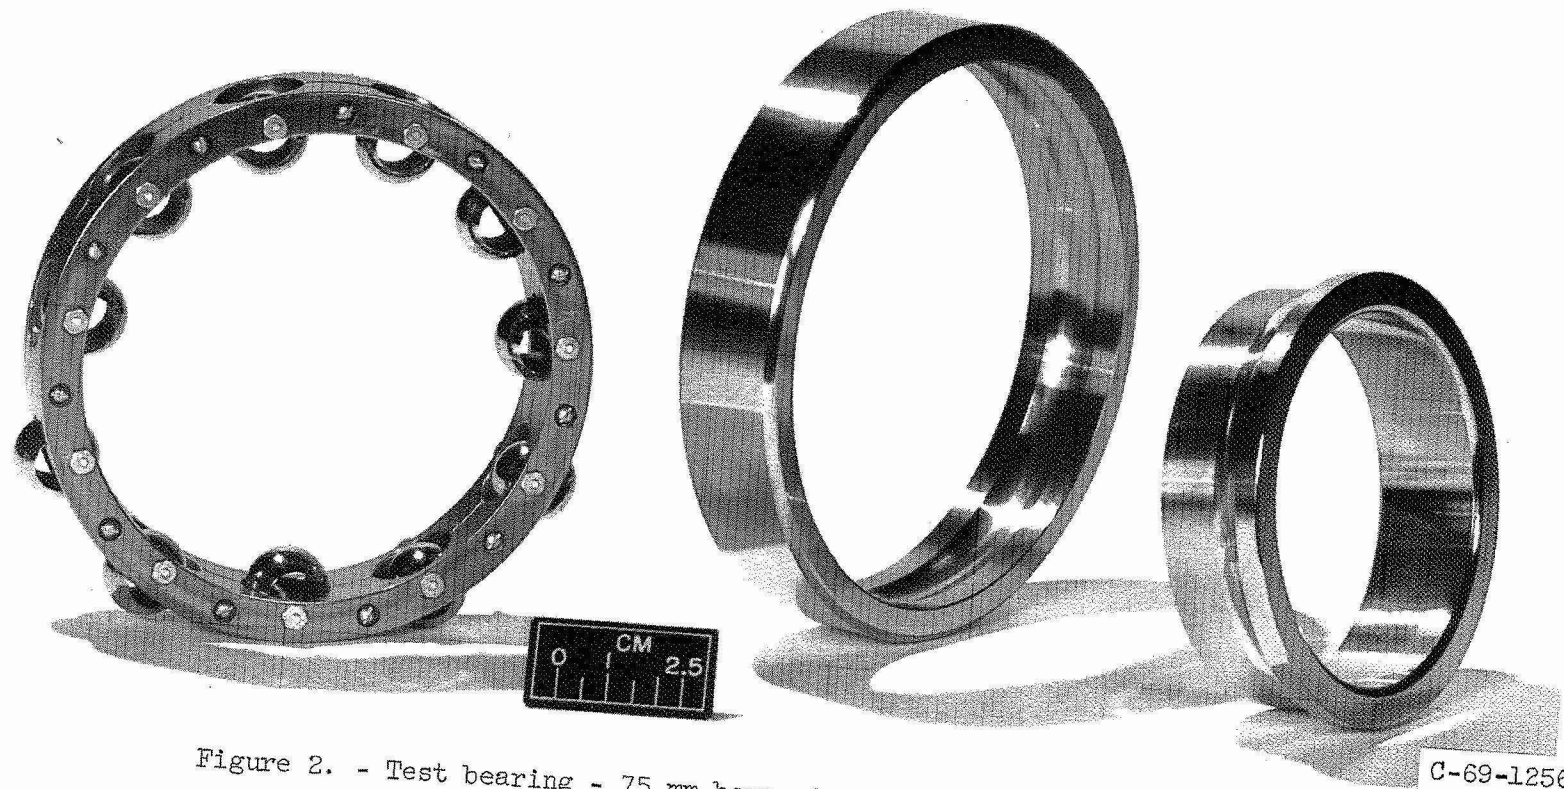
Test bearing - 75 mm bore size with machined hollow balls.
